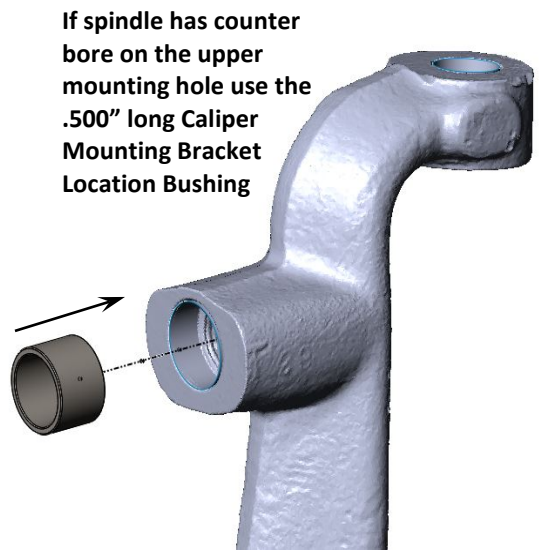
Intermediate Caliper Mounting Bracket Installation (Driver Side Shown)
